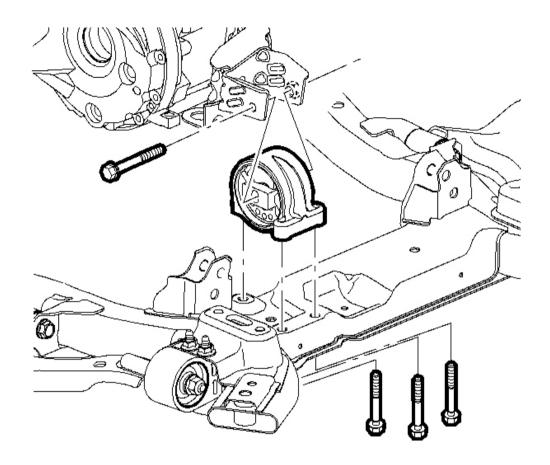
Locating Engine Mount Courtesy of GENERAL MOTORS CORP.
